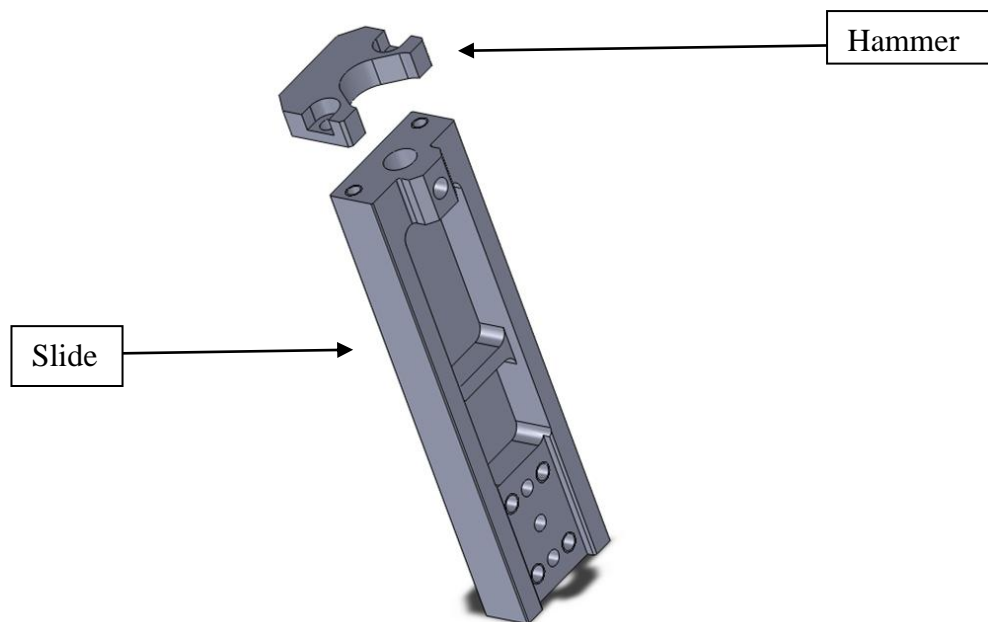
SLIDE AND HAMMER EXPLODED ASSEMBLY VIEW.
